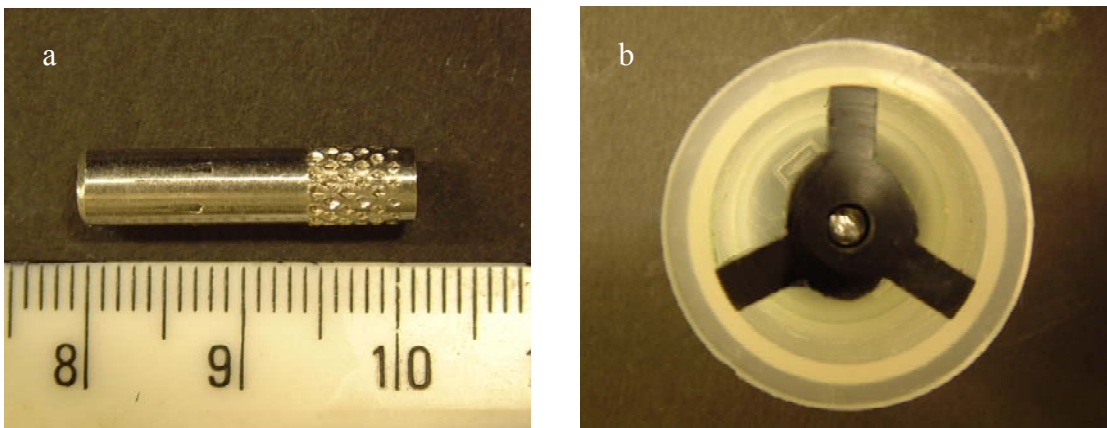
(a) Dimensions of a 316L stainless steel with knurl (knurled-specimen) before mounted with resin and (b) was held by a holder to ensure the pin was in centre of the plastic mould
